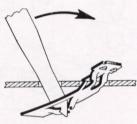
The Snap Nut shown above is one of several types of blind screw fasteners used in sheet metal. Fastener is snapped in place from one side, subsequent expansion of thread-engaging members spreads fastener out so that it wedges tightly in hole.
